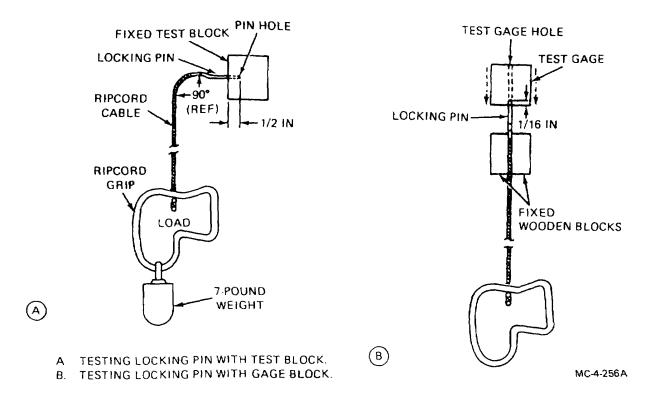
Performing a Ripcord Pin Test, Typical.
